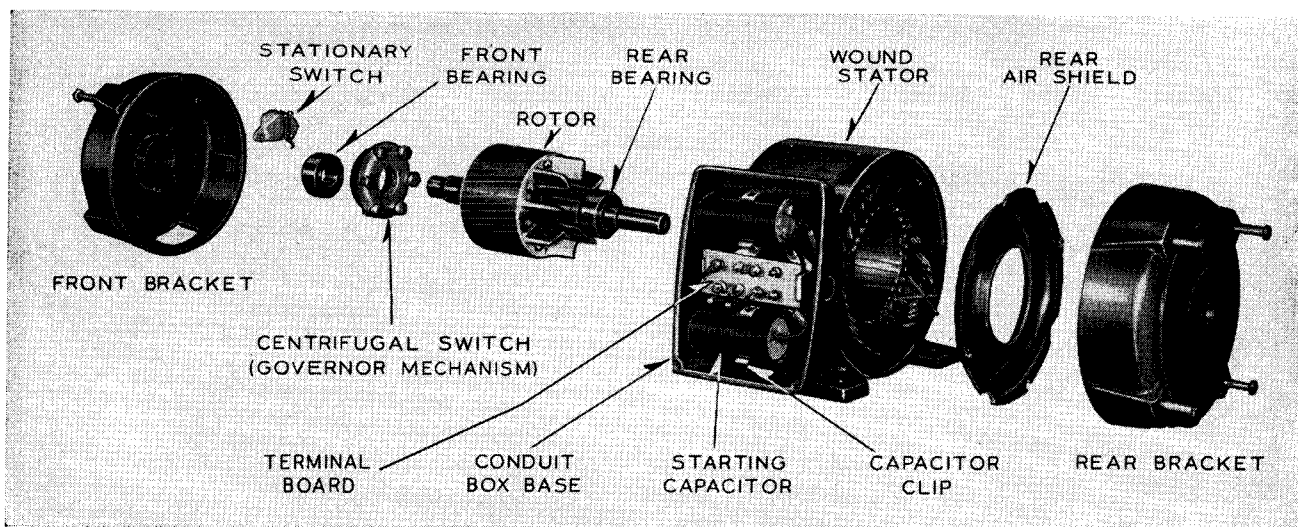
Arrangement of Parts—Drip-proof Model AL Motor (Dual Voltage)
